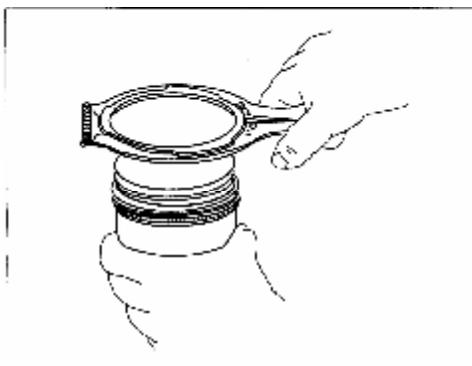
Installation of Piston Ring Using A Piston Ring Expander
